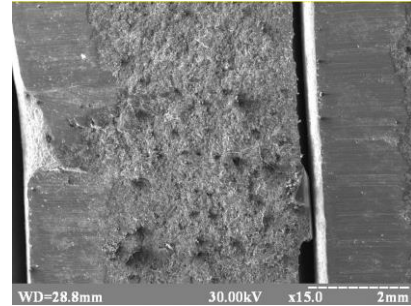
Combined rupture of the weld seam and the weld zone.
